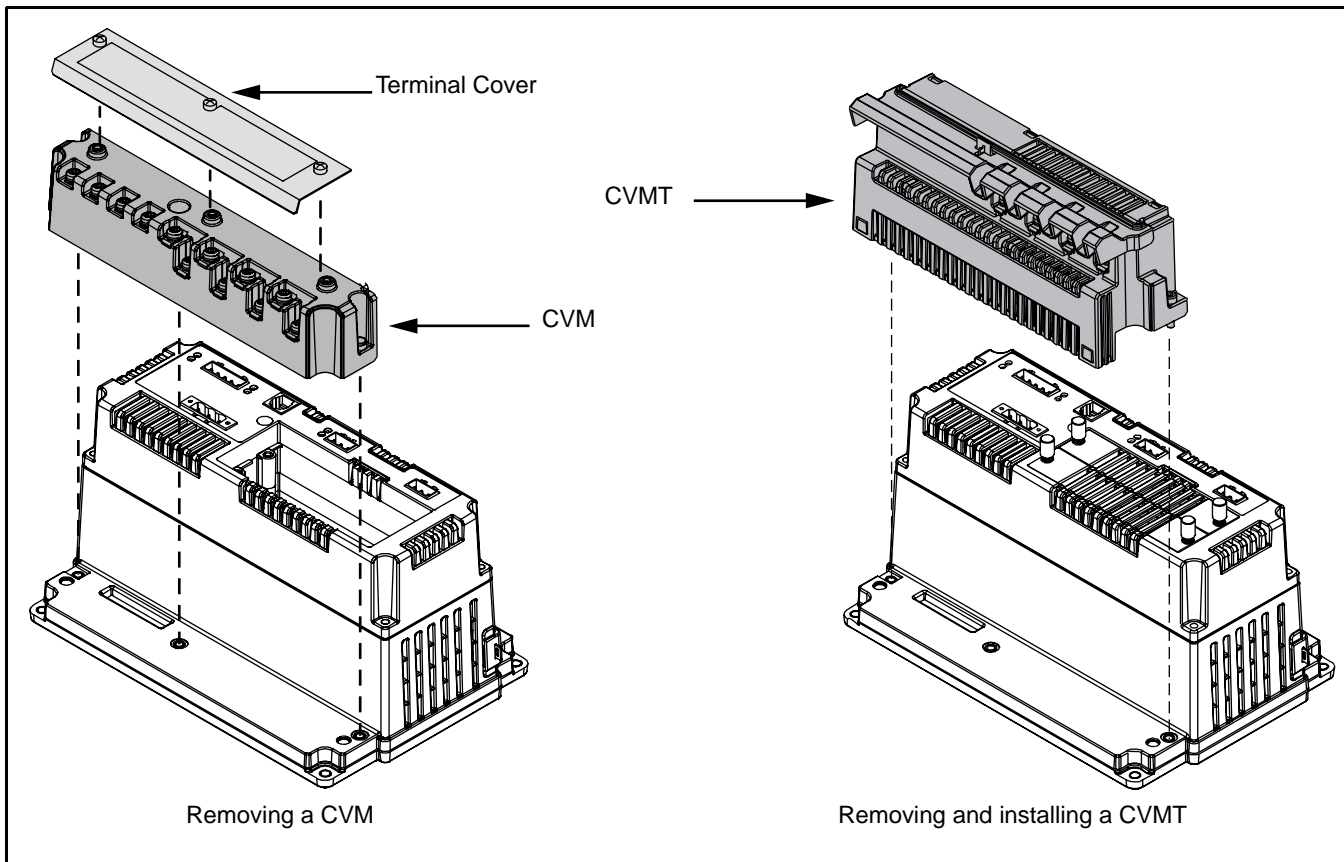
Removing a CVM or CVMT and installing the CVMT.
